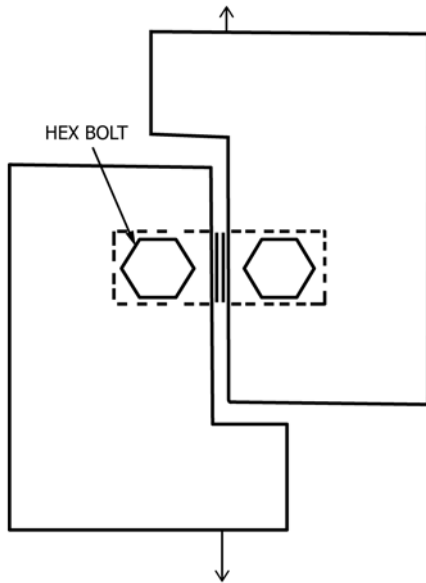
Drawing of the Recommended Shear Test Specimen Assembly
